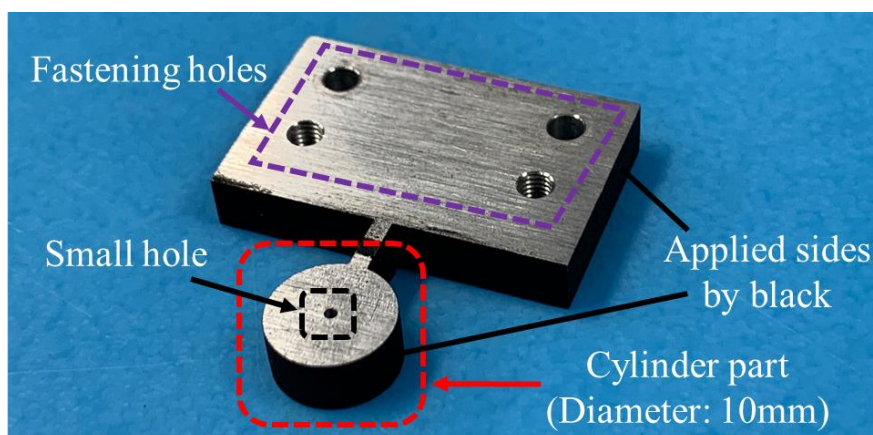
Duralumin plate with cylinder part with a small hole and fastening part.
